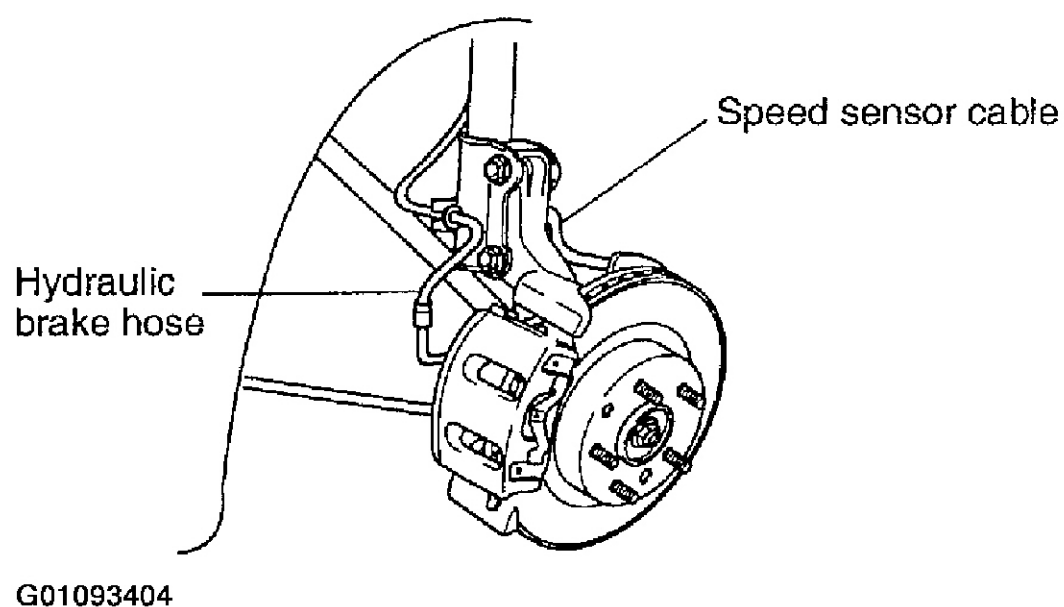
Removing The Brake Hose & The Speed Sensor Cable
